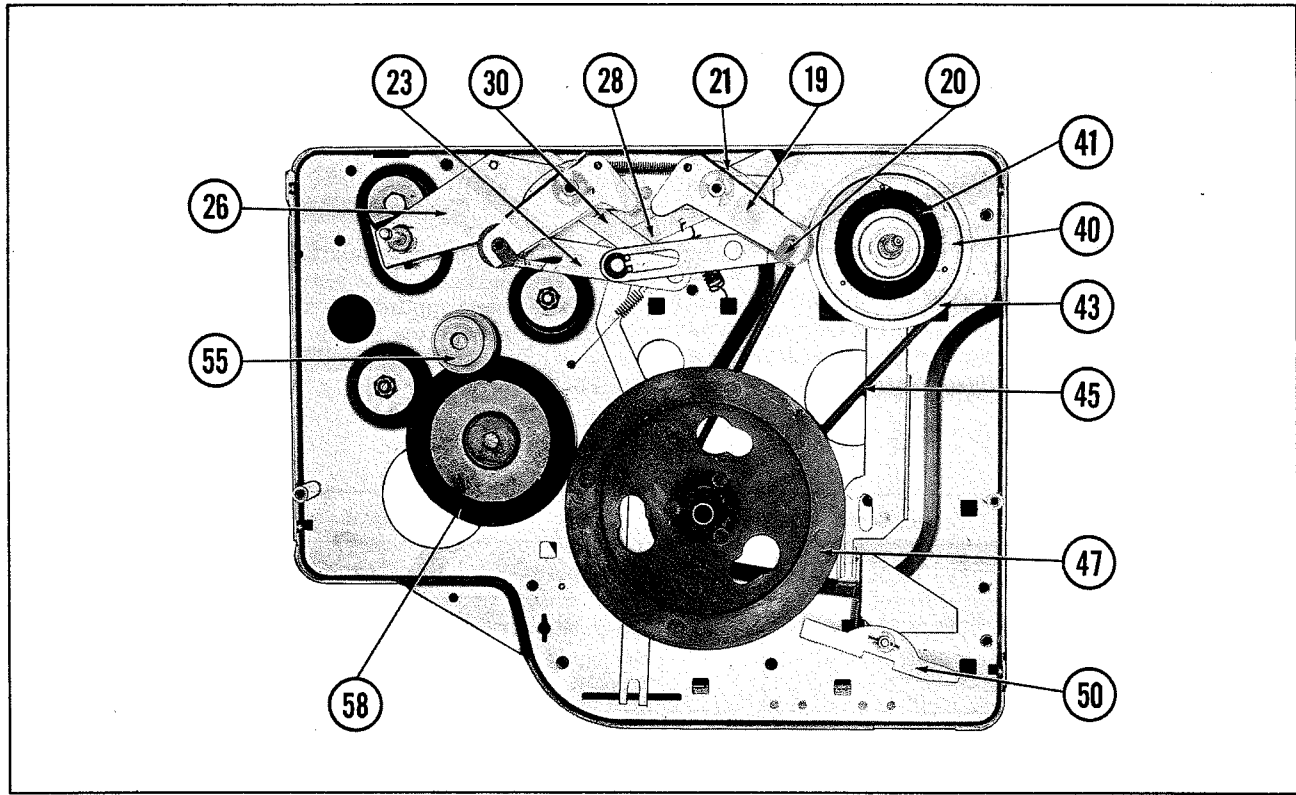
Top View of Transport Mechanism With Top Mechanism Plate Removed
